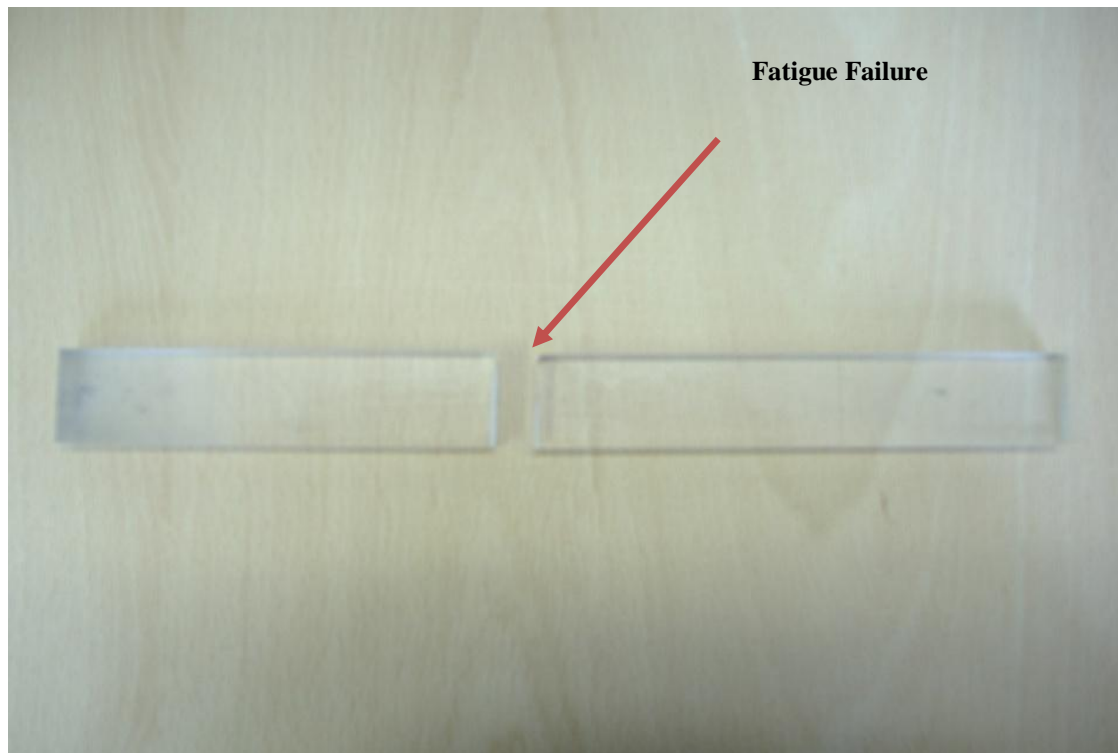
Failure of the PMMA specimen using fatigue machine
